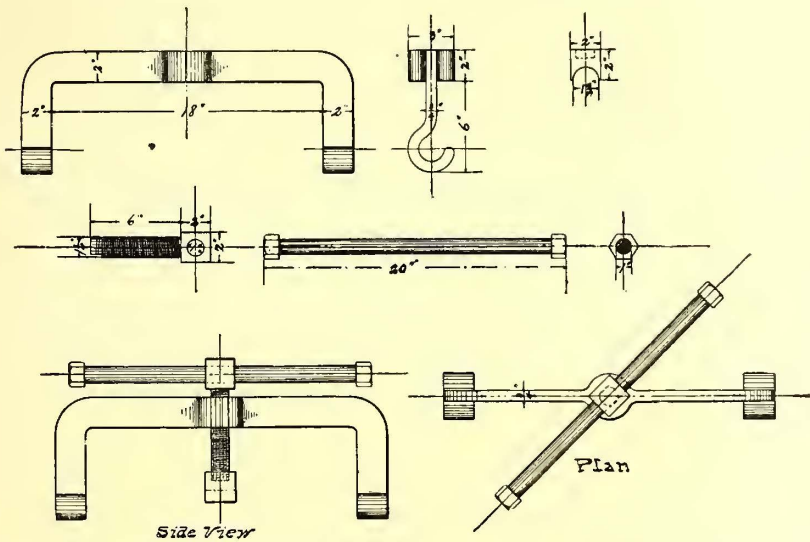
DETAIL, SIDE ELEVATION, AND PLAN OF JIM CROW
